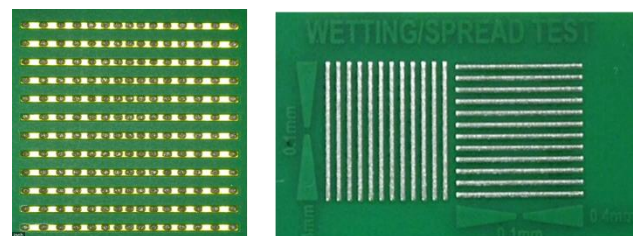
Wetting Reflow Patterns. Printed Solder Paste (Left) and Reflowed Solder (Right)
